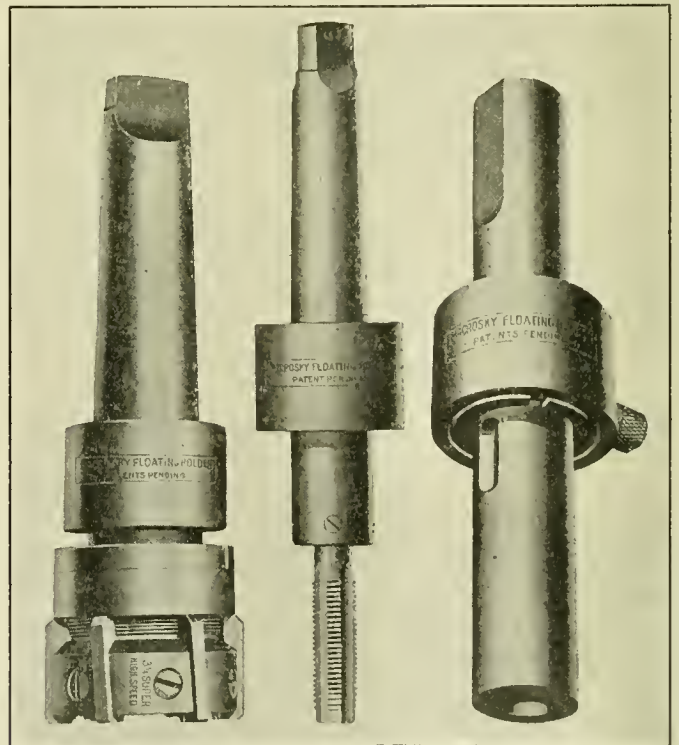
Floating Holders for Reamers, Taps and Morse Taper Tools
